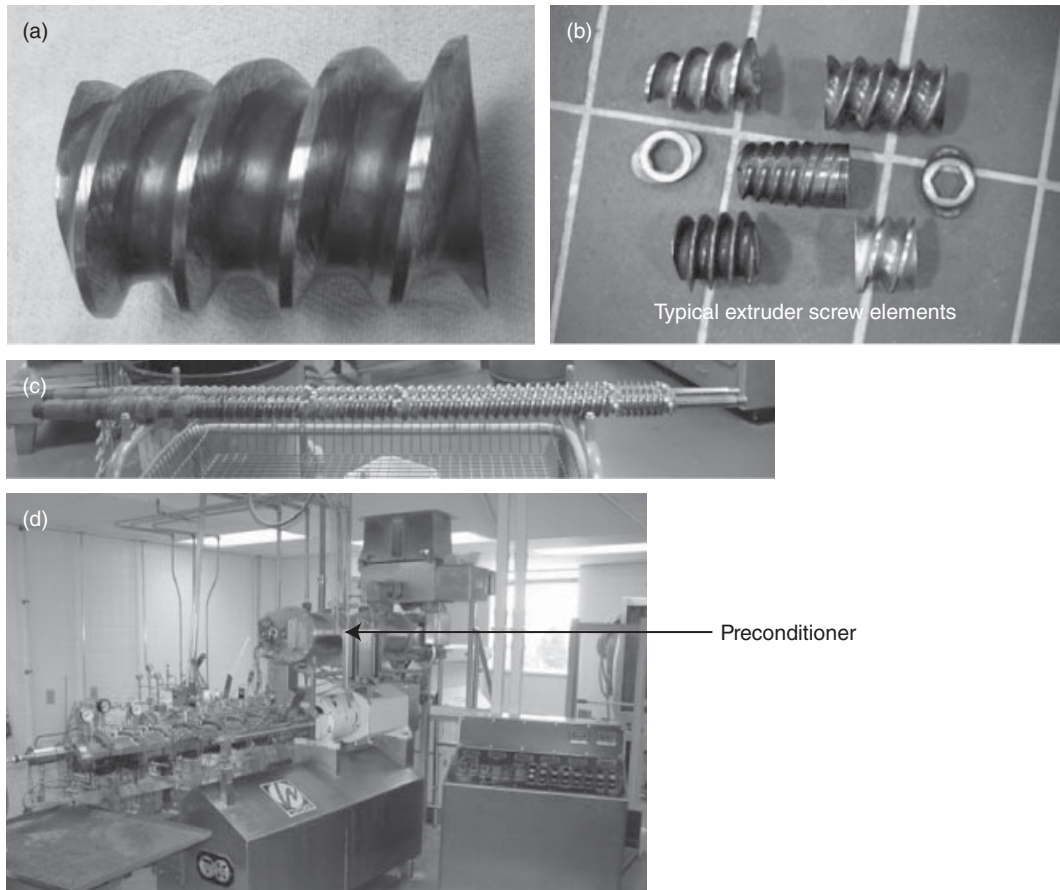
(a) A screw element; (b) typical screw elements; (c) screw is formed by attaching several elements together in various configurations; (d) assembled twin-screw extruder during operation.
